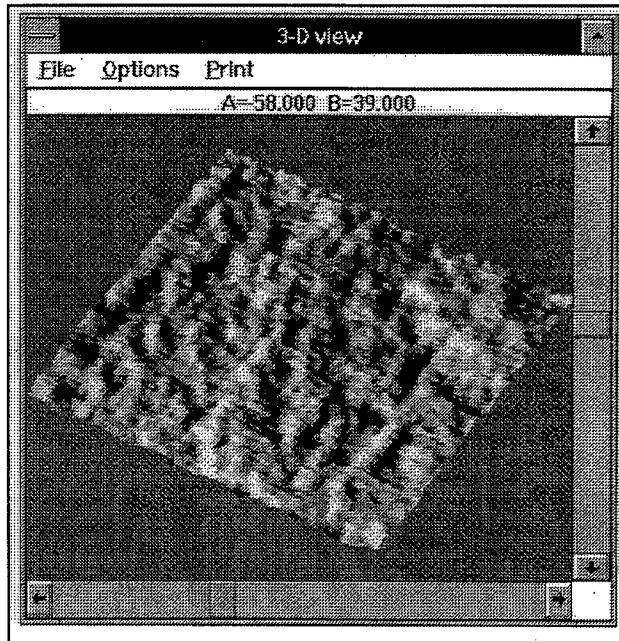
3D View of an AWJ Milled Sample (AD85 alumina ceramic).
